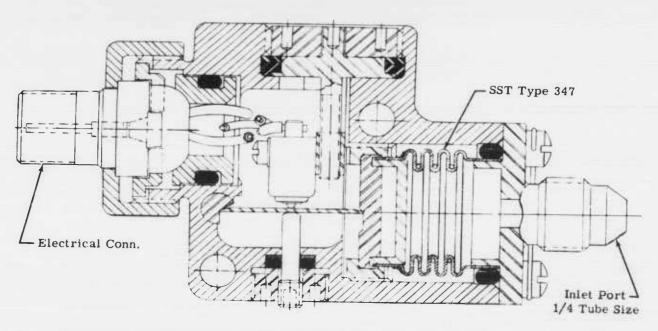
Cross Section - Pressure Switch Assembly 62-472-667-1, -3, -5, and -7
